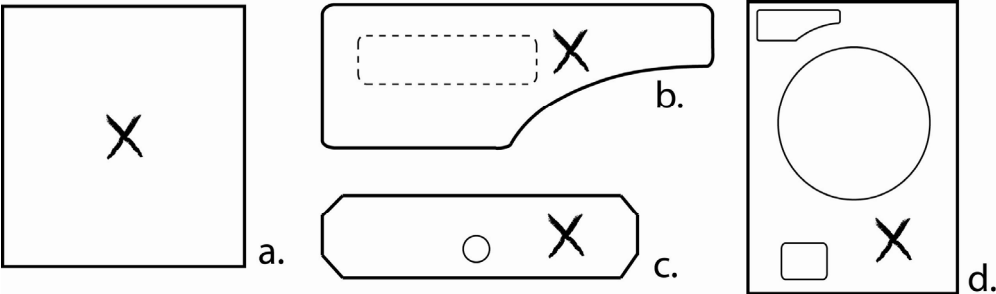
A schematic sketch showing where the measurements have been made on different types of components; a. square/rectangular sheets such as top sheets and front doors, b. lid to detergent pocket (with or without hole), c. reinforcement plate to the bottom sheet of a DW d. front sheet to a WM. The components are sketched in different scales to enhance the understanding.
